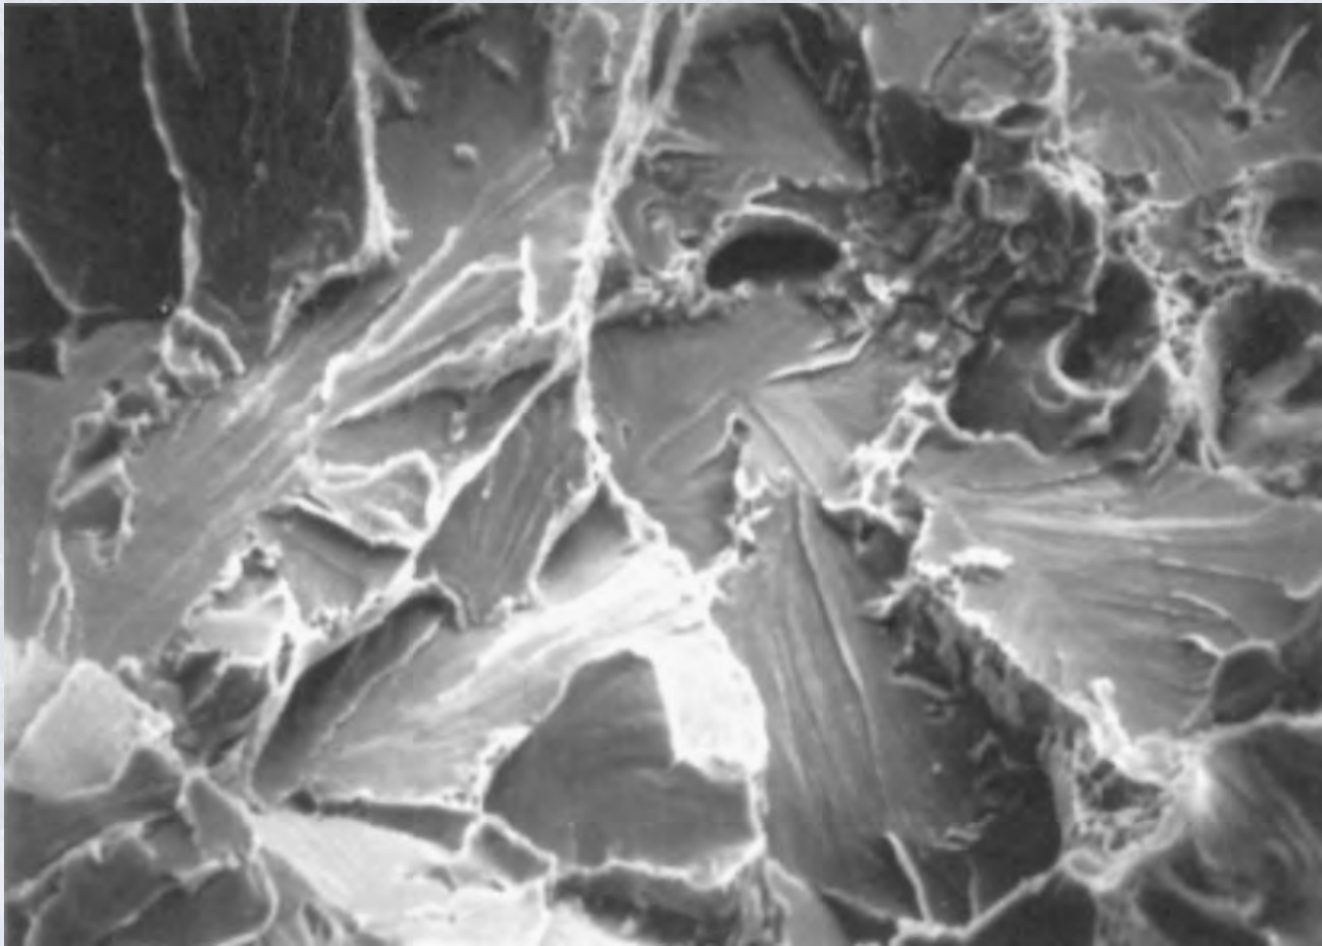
Fracture surface of steel that has failed in a brittle manner. The fracture path is transgranular (through the grains). Magnification: 200x. *Source:* Courtesy of B. J. Schulze and S.L. Meinley and Packer Engineering Associates, Inc.
